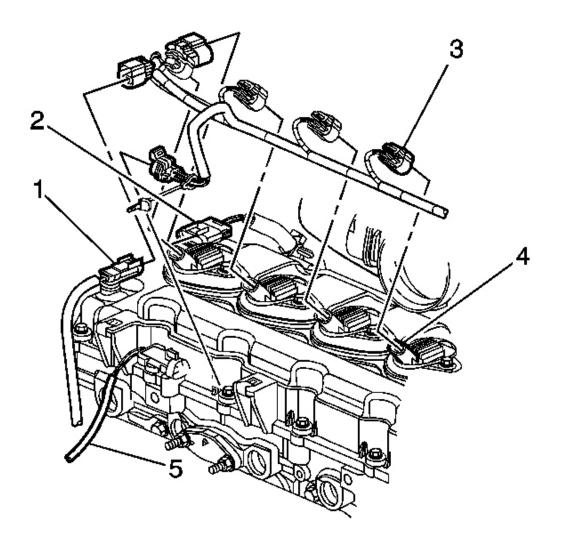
View Of ECT Sensor, Fuel Injector, Ignition Coil & HO2S Engine Wiring Harness Electrical Connectors
